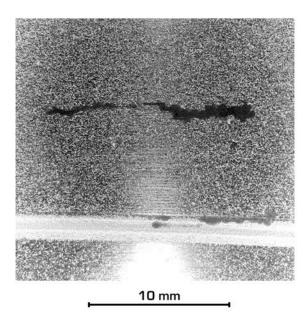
Dye penetrant indication of the produced realistic crack in Inconel 600 safe-end in the heat affected zone of the buttering weld.
